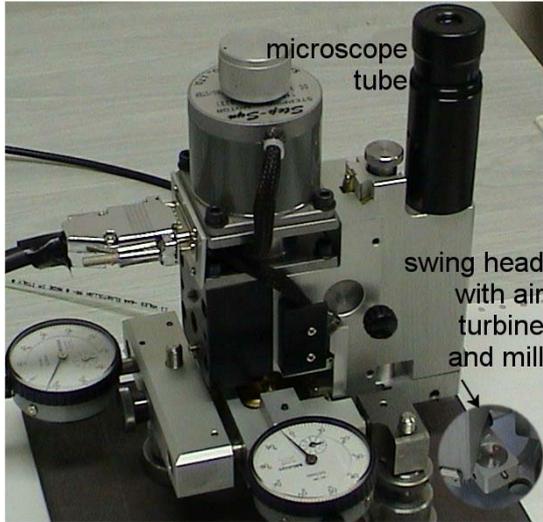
Residual stress measurement hole-drilling equipment SINT 3000.
